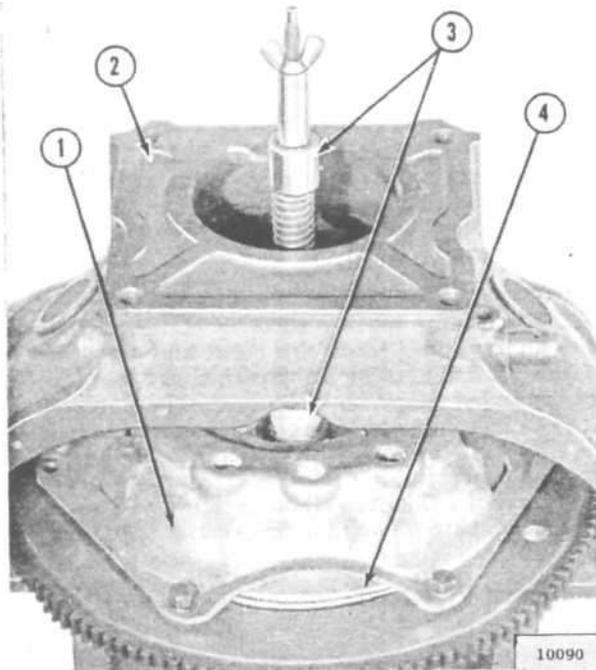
INSTALLING CLUTCH ON FLYWHEEL
